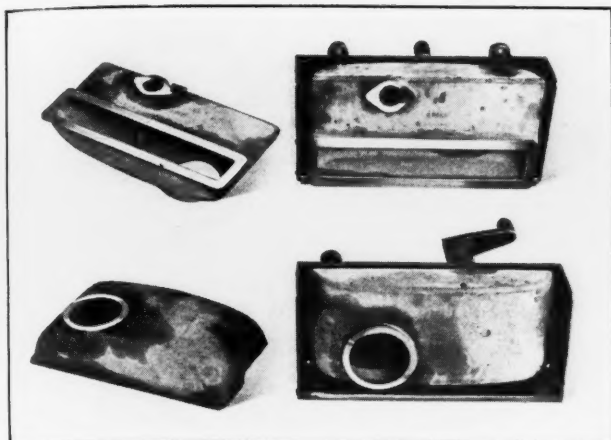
Fixtures Employed in Grinding Surfaces on Two Sides of Another Radiator Frame Casting
